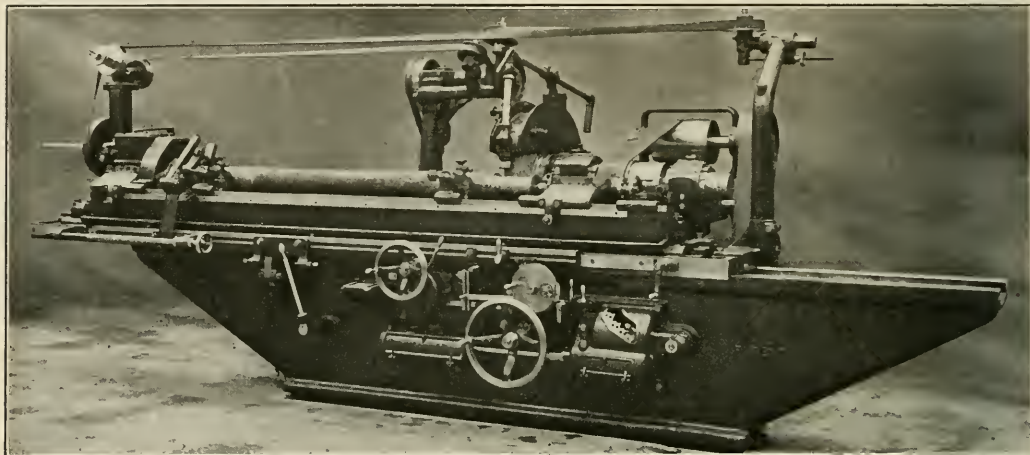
Churchill Plain Cylindrical Grinder Used for Finishing Car Axle Journals
